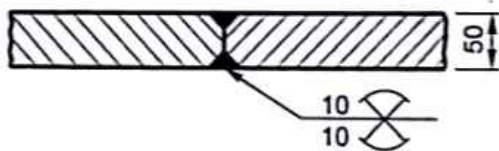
Partially penetrated butt-weld on both sides
